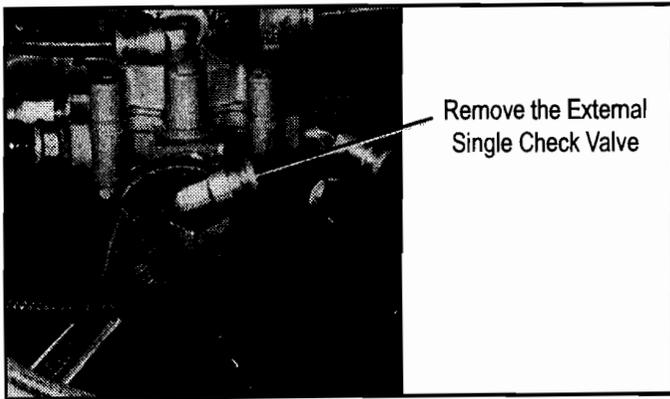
REMOVING THE EXTERNAL SINGLE CHECK VALVE
